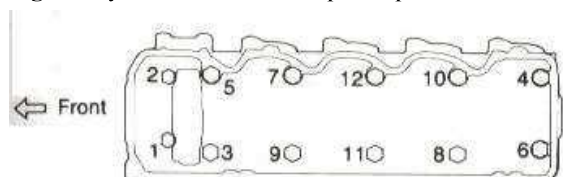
Cylinder Head Bolt Loosening Sequence.
